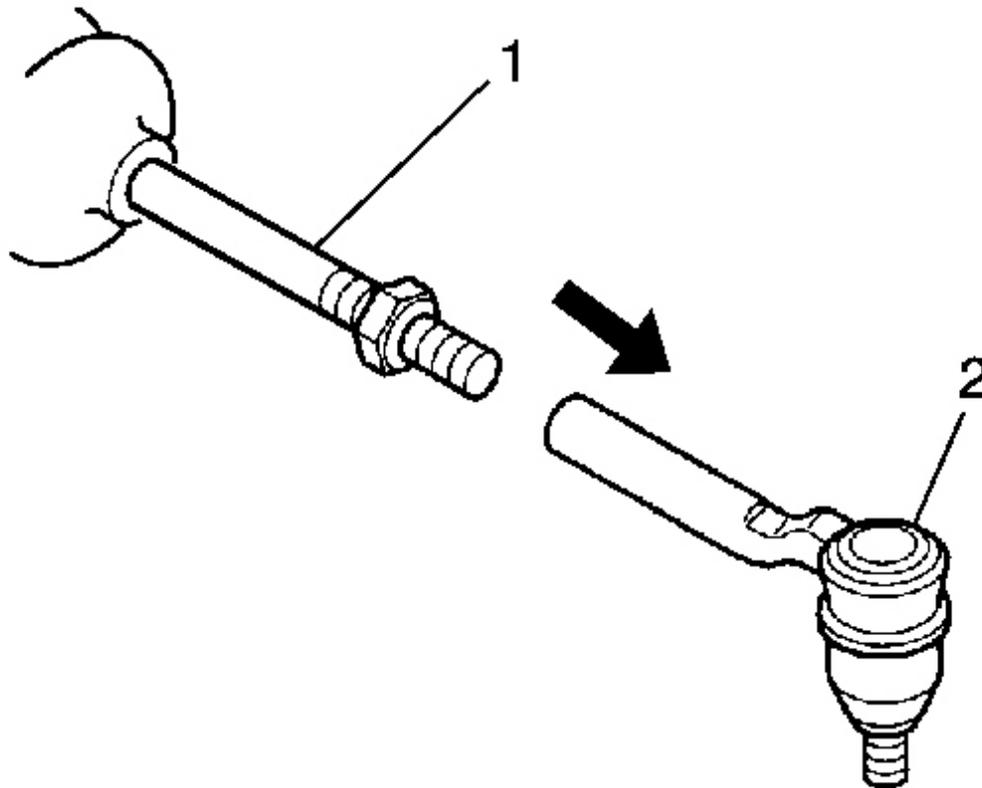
Identifying Steering Linkage Inner & Outer Tie Rod
